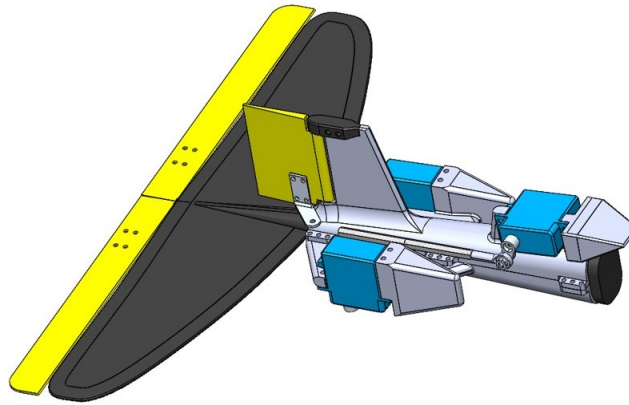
3D printed elevator and rudder flap assembly mounted on the aft hydrofoil
